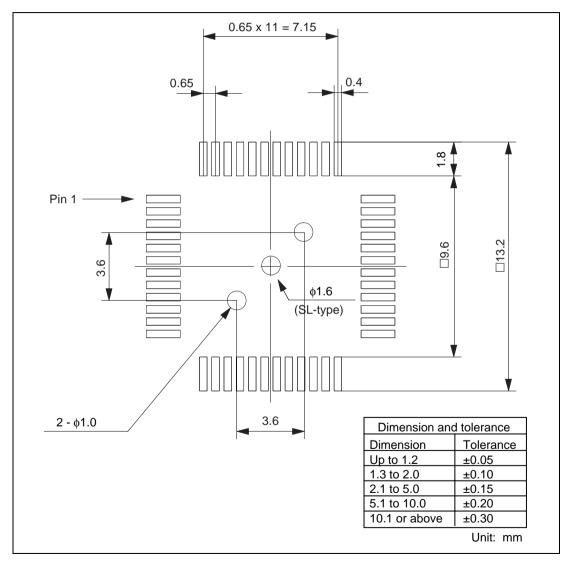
Recommended Dimensions for Mount Pad for PLQP0048JA-A (Former Code: FP-48F)
